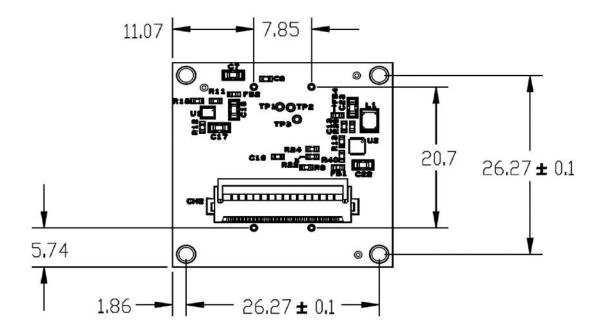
Rear View of e-CAM30\_CUNANO Adaptor Board Mechanical Dimensions
